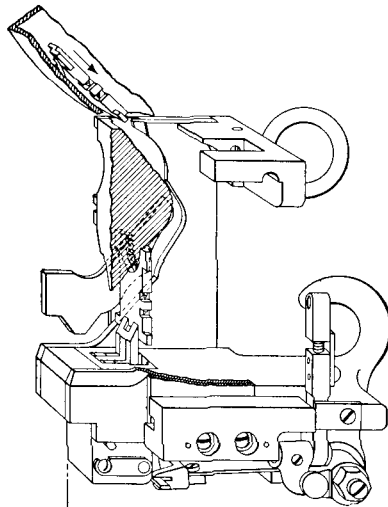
Side view of the lower distributor box, showing the path of the matrix and how it is turned so as to bring the upper ear over the top of one rail and the lower ear beneath this rail. This also shows an enlarged view of the pawls.
